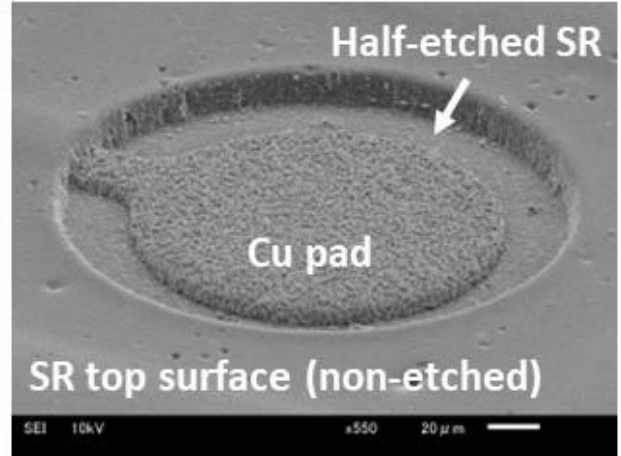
SR opening with a exposed Cu pad after half etching of SR layer
